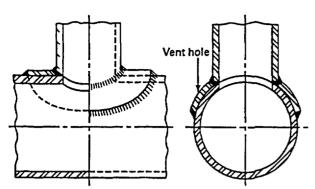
(B) TYPICAL WELDED BRANCH CONNECTION WITH ADDITIONAL REINFORCEMENT
